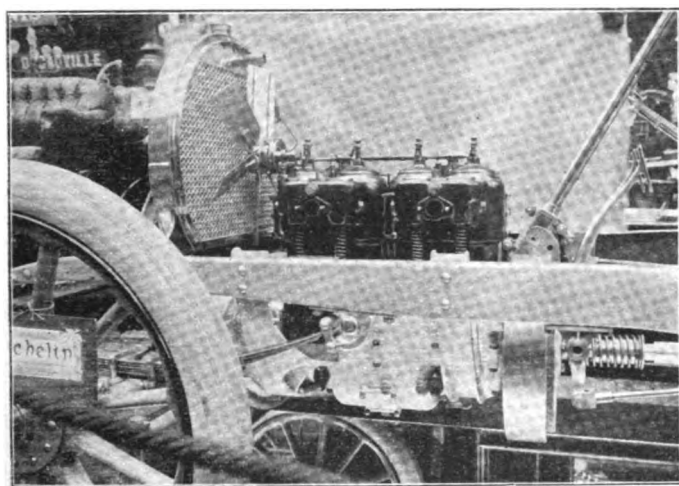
View of Front Portion of Hotchkiss Chassis.
